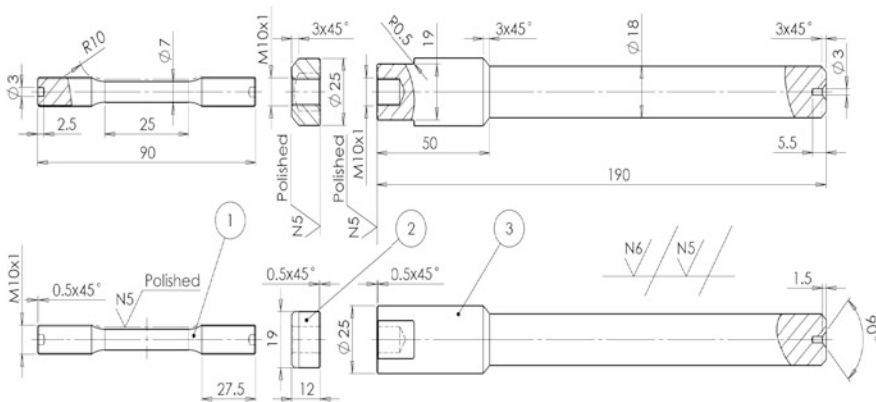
Specimen and specimen holder for testing LCF of steel NN-70 [8]. Item 1, LCF specimen, NN-70, D = 7 mm; item 2, Jam nut, 42CrMo4; item 3, Grip holder, 42CrMo4.
